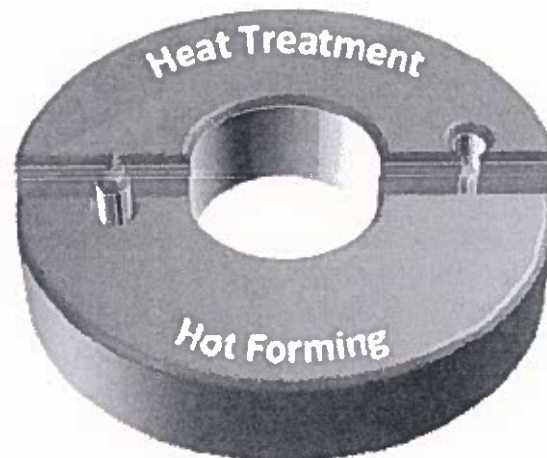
Press hardening / Hot stamping – integrated thermo-mechanical processing consisting of a combination between heat treatment and hot forming
